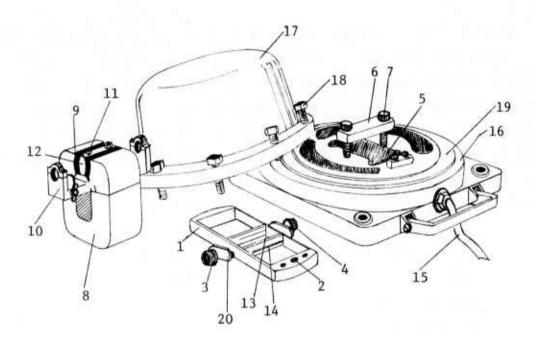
Schematic drawing of the VBP-3 seismometer [6]
